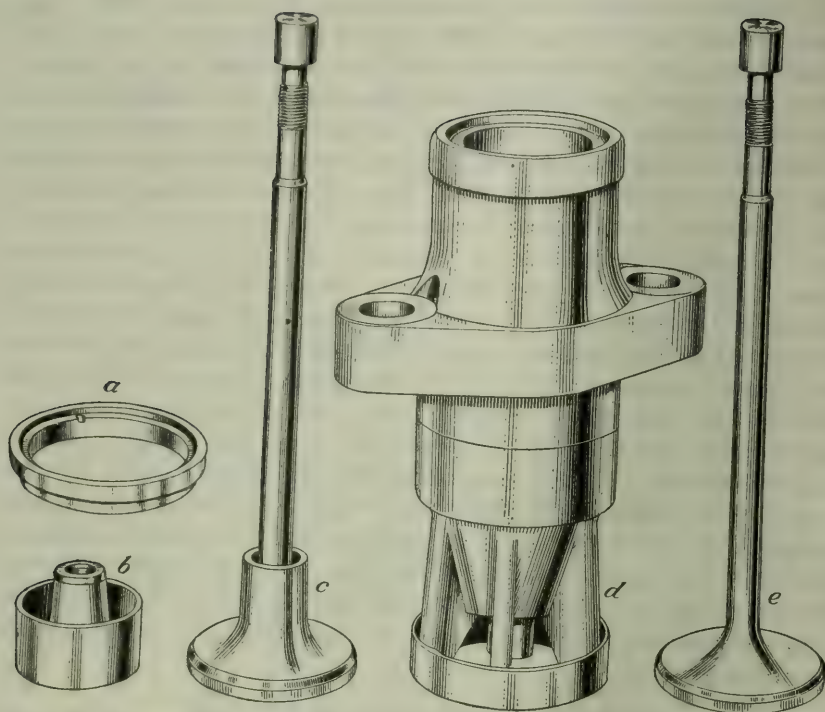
Valves and valve fittings. *a*, removable valve seat; *b*, spring cap; *c*, exhaust valve in stem; *d*, valve cage; *e*, air admission valve in stem.
